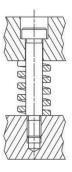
Shoulder bolt used to contain a spring in a stamping die.
